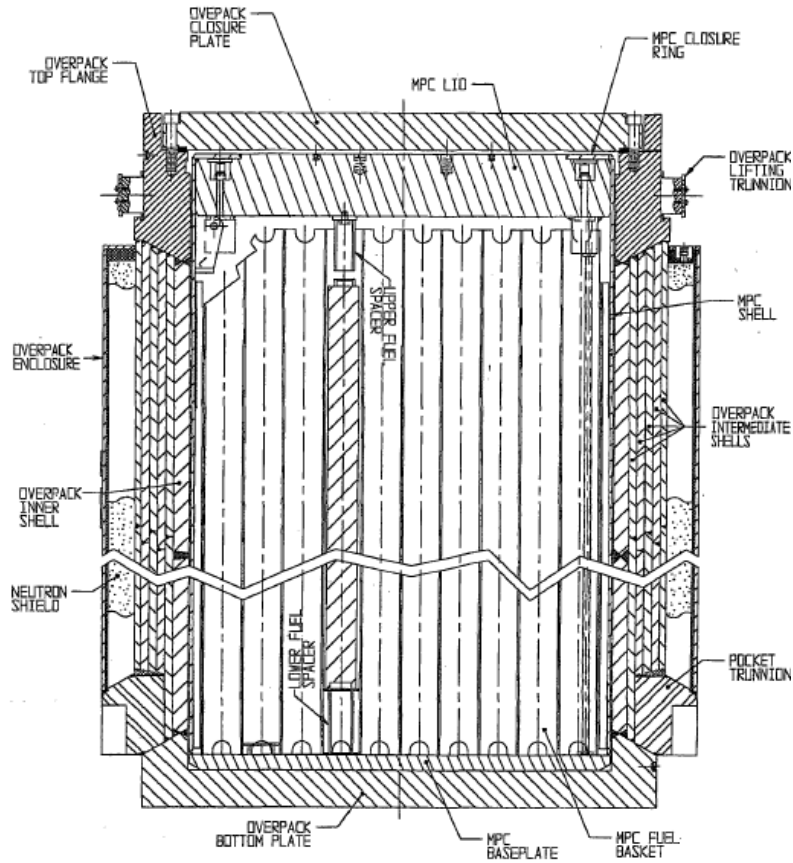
; CROSS SECTION ELEVATION VIEW OF HI-STAR 100 SYSTEM
